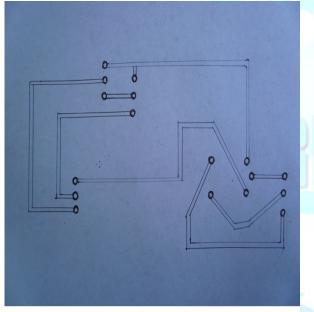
Improvised version of PCB layout-with maximum possible minimised errors
